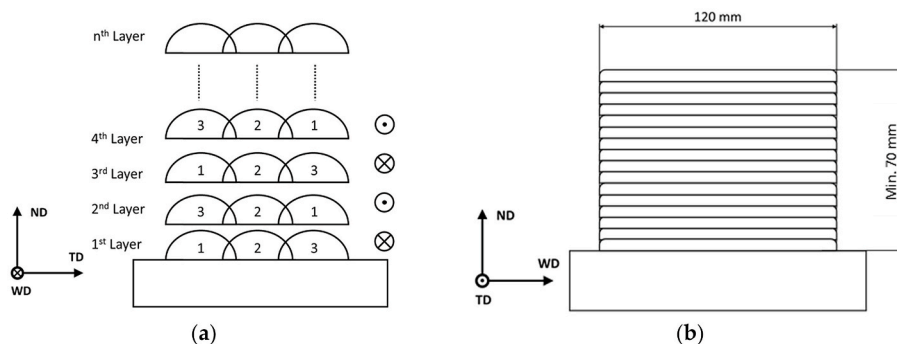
(a) Schematic illustration of the selected welding sequence; (b) side view of the AM structure with the required minimum dimensions [23].
